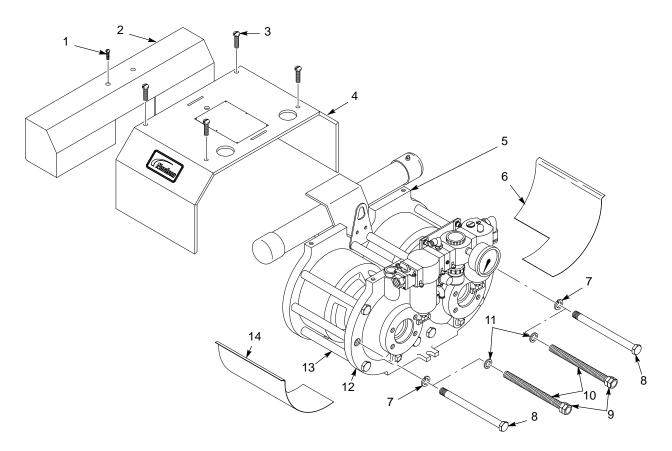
Air Motor Disassembly – Removing Covers and Releasing Spring Tension
